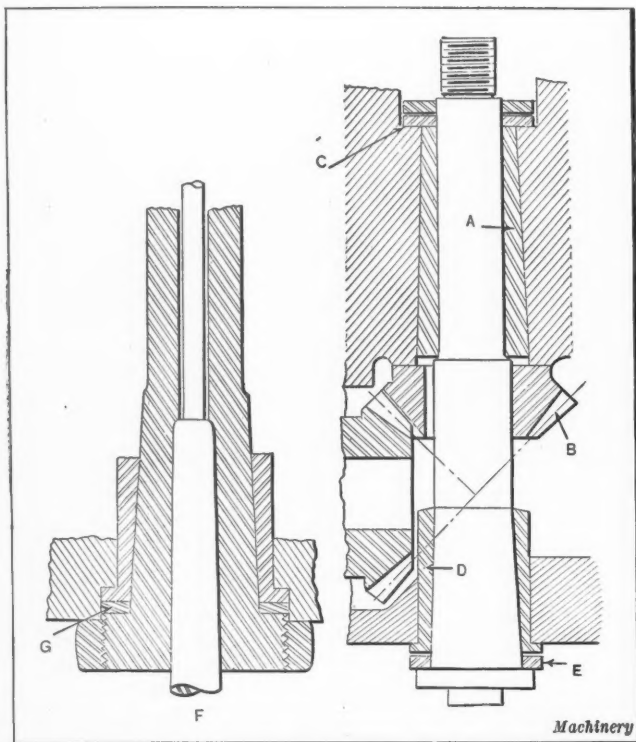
Diagrams of Milling Machine Spindle Mountings
